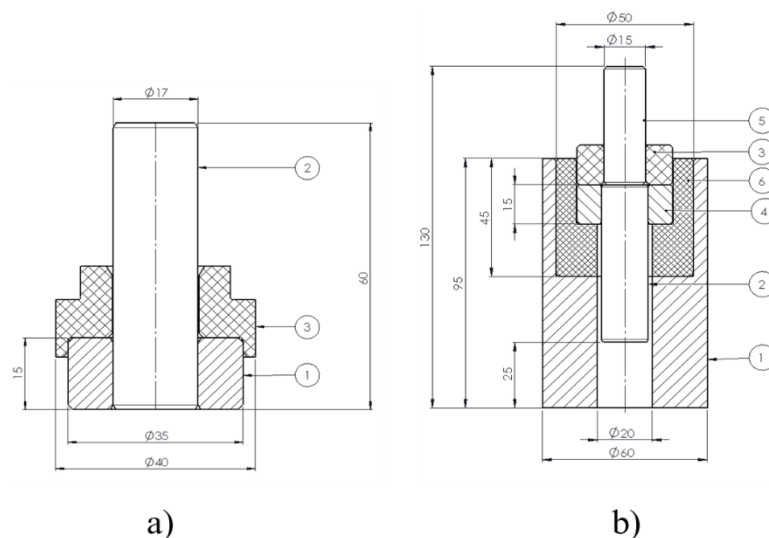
Fixtures used for (a) coupling phases: 1 hub, 2 shaft, 3 centering tool. (b) decoupling tests: 1 cylindrical support, 2 shaft, 3 centering tool, 4 hub, 5 pin, 6 heat insulating support. All dimensions in millimeters
